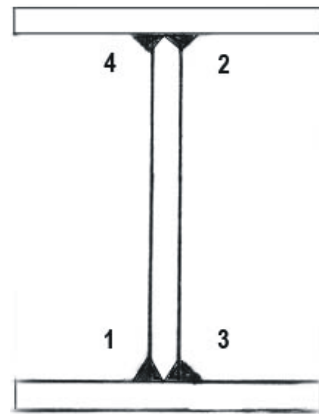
Sequence of welding in plate girder with single SAW
